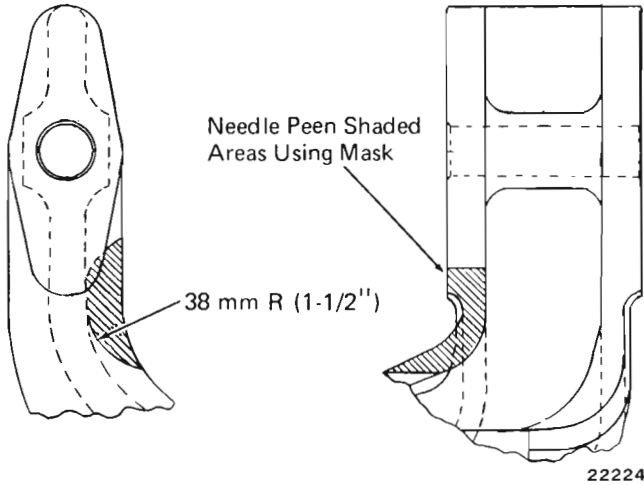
Pinion End Axle Cap Gear Case Support Arm Needle Peening
